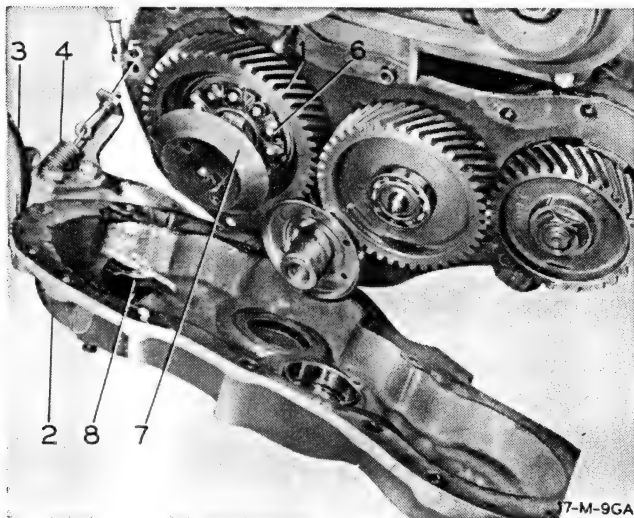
Timing Gears, Timing Gear Cover, Crankshaft Pulley
